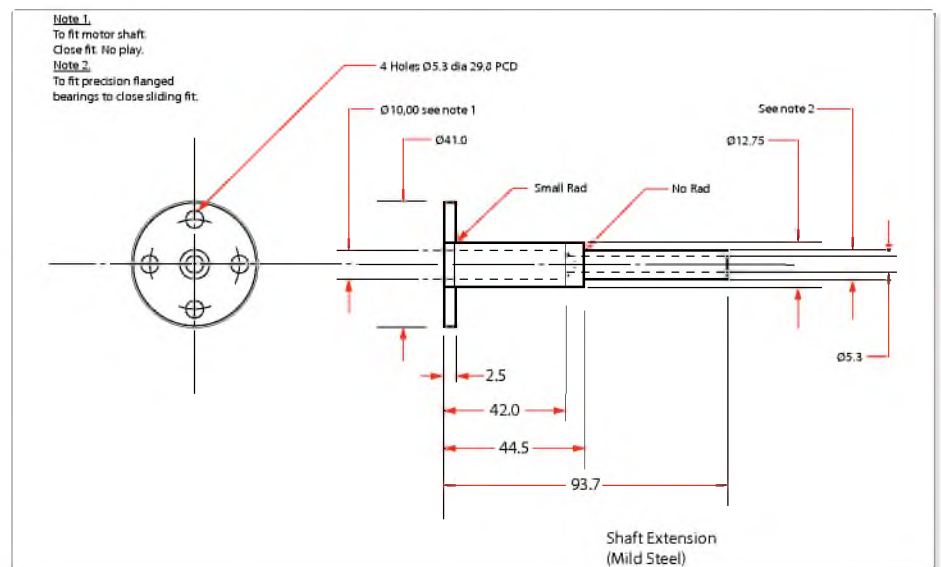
The flanged shaft extension is the most critical component in the assembly. Get this right and you are in with a chance!
